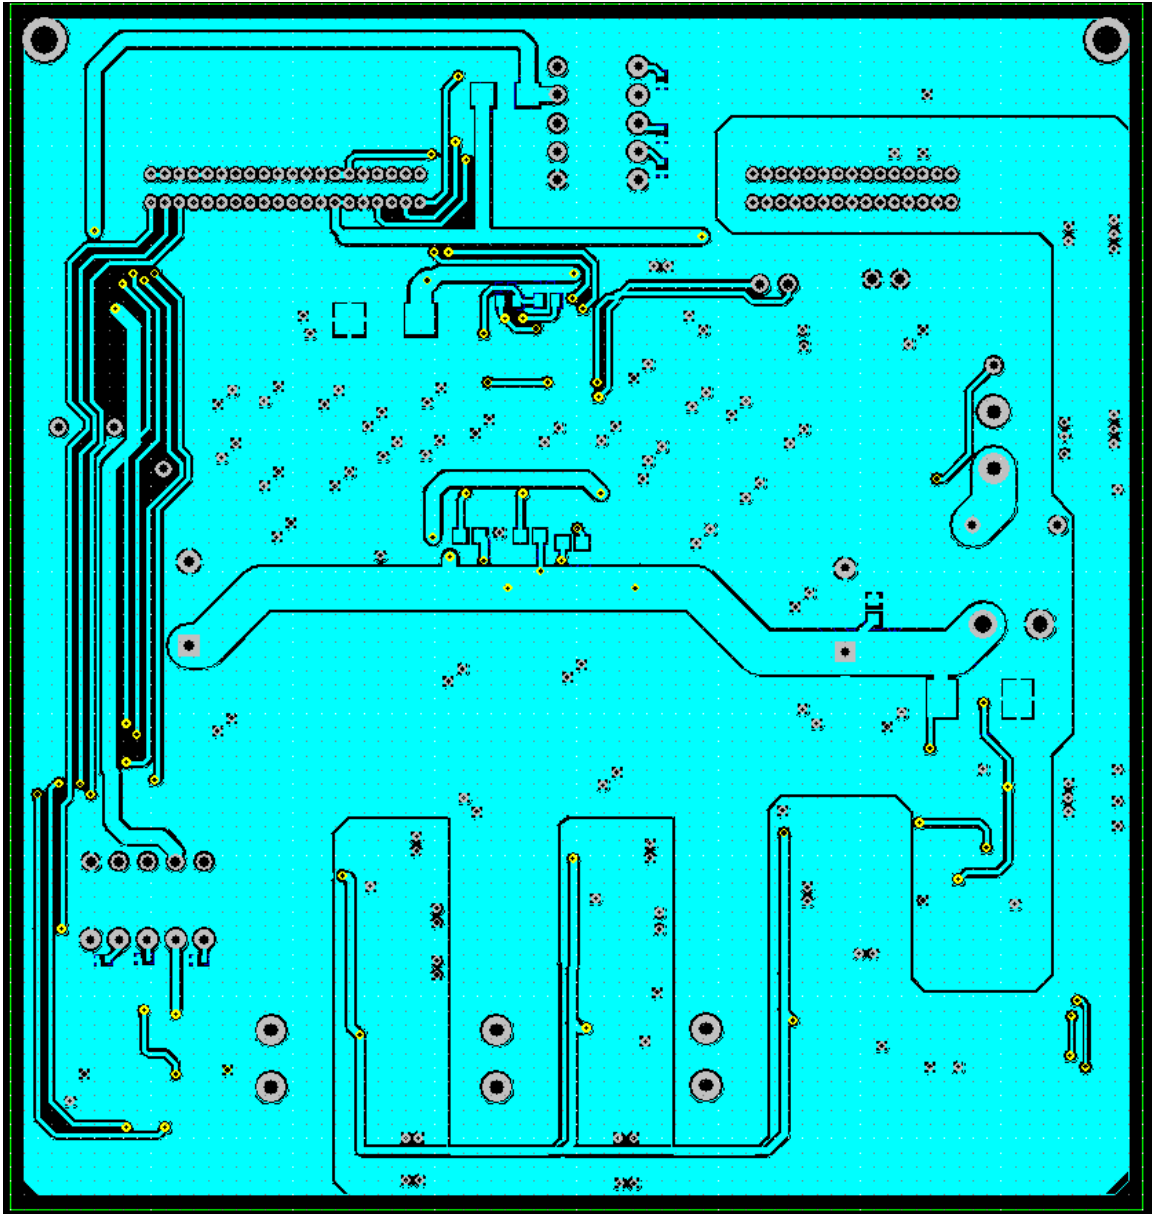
AC Daughtercard layout, bottom copper & bottom silk
